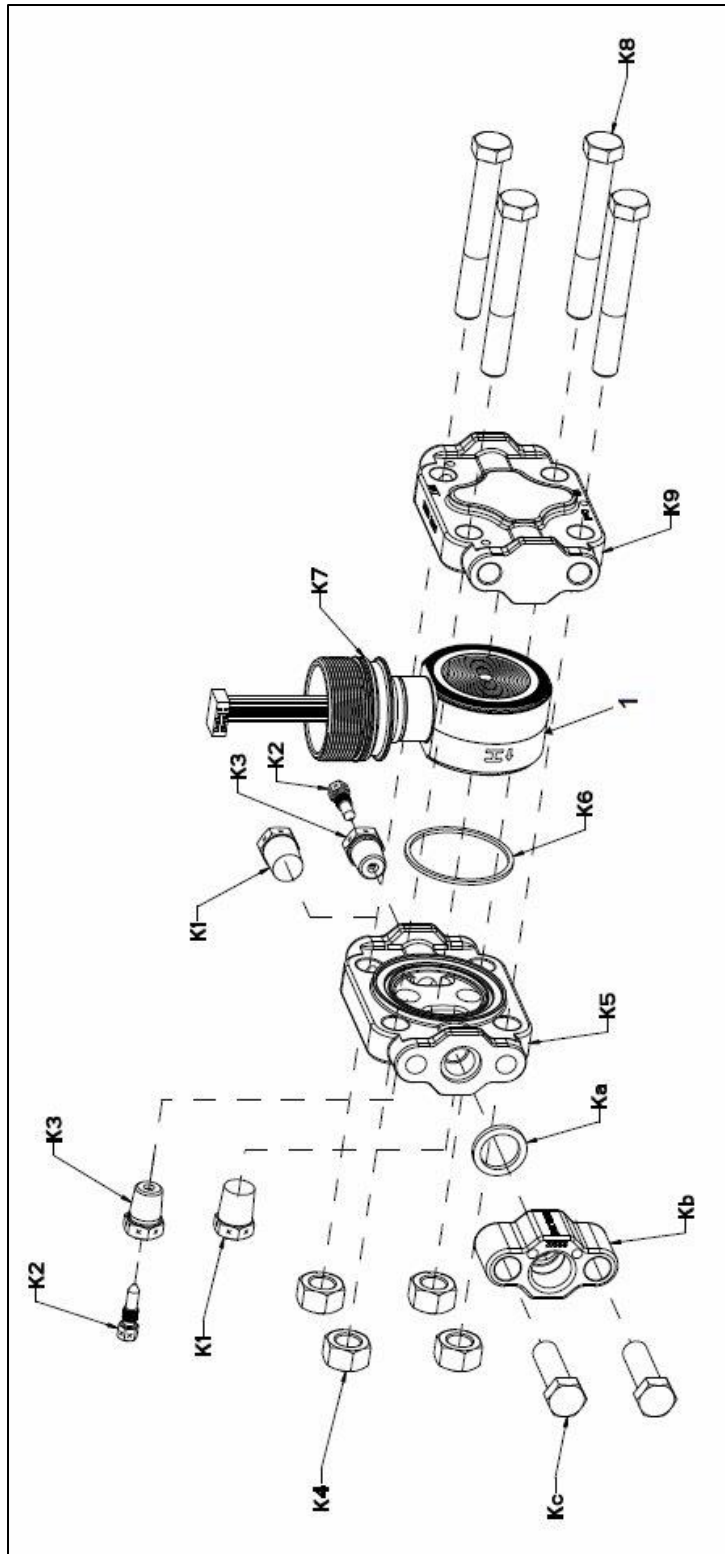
STG830, 840, 870, and STA822, 840 Transmitter Body
